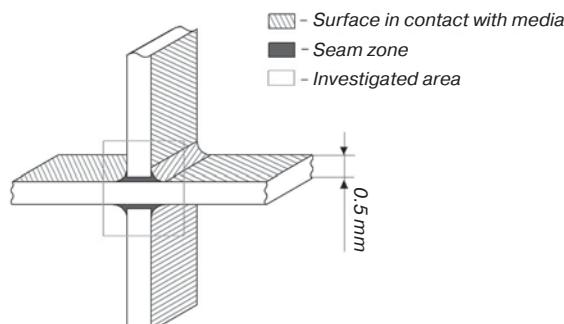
Scheme of cell sample for metallographic investigation after the corrosion test
